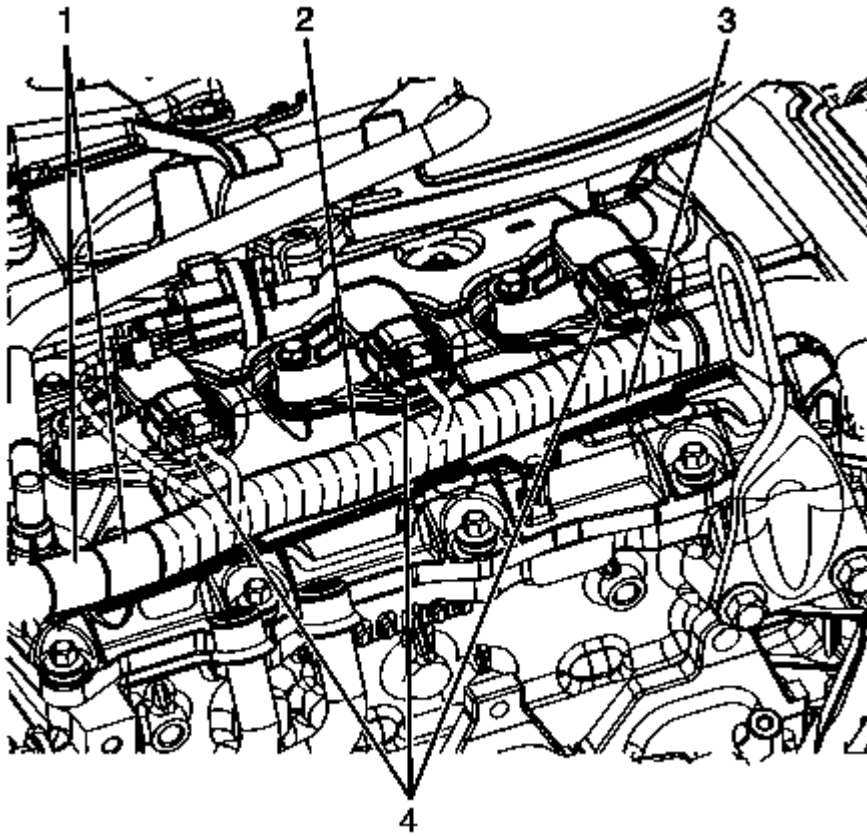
Ignition Coil Electrical Connectors & Wiring Harness
